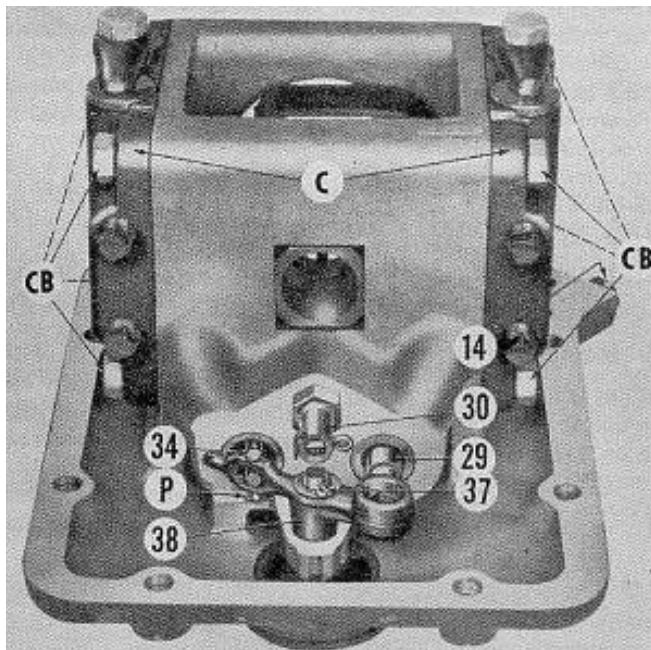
Model 8N hydraulic pump assembly showing the intake control valve (29), safety relief valve and check valve unit (30) and rocker lever (38) for actuation of the control valves. The exhaust control valve is shown at (34). Valve chamber covers (C) are also the pump cylinders.
